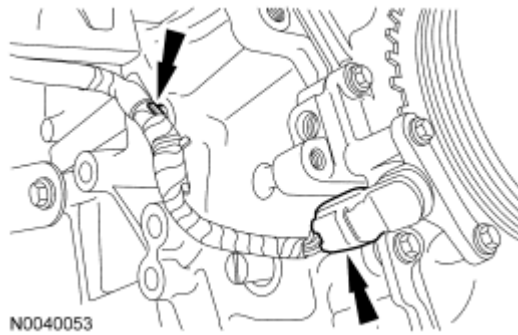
Locating Crankshaft Position (CKP) Sensor Electrical Connector And Harness Pin-Type Retainer
